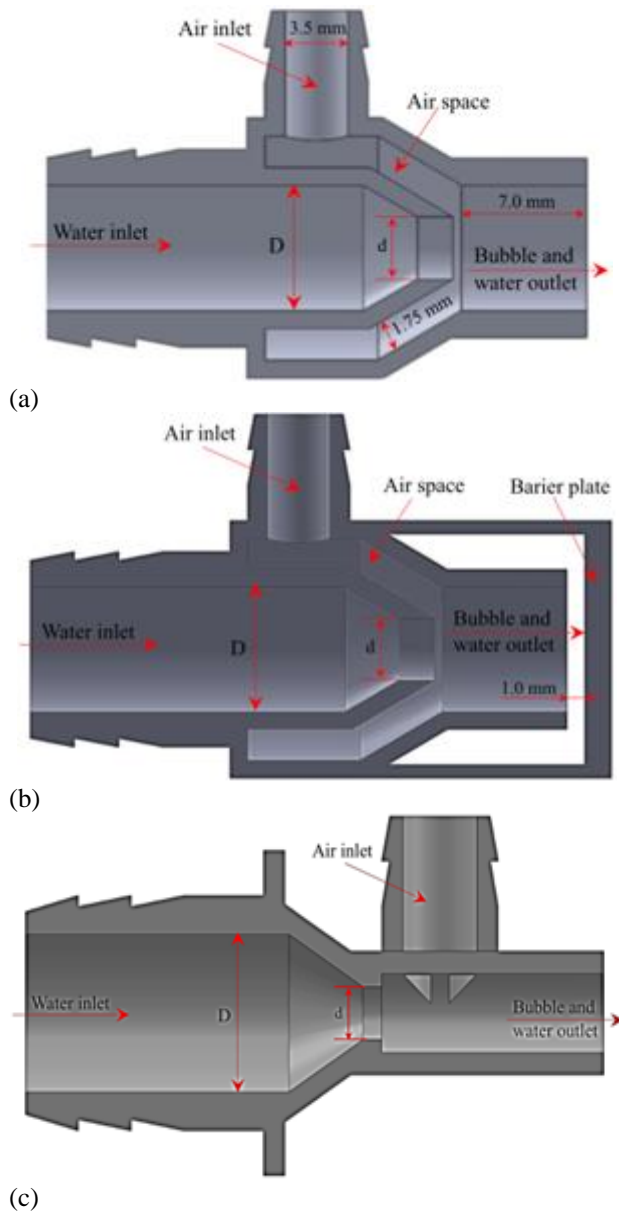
Section view: (a) Ejector bubble generator type, (b) Ejector-barrier plate bubble generator type, (c) Venturi bubble generator type
